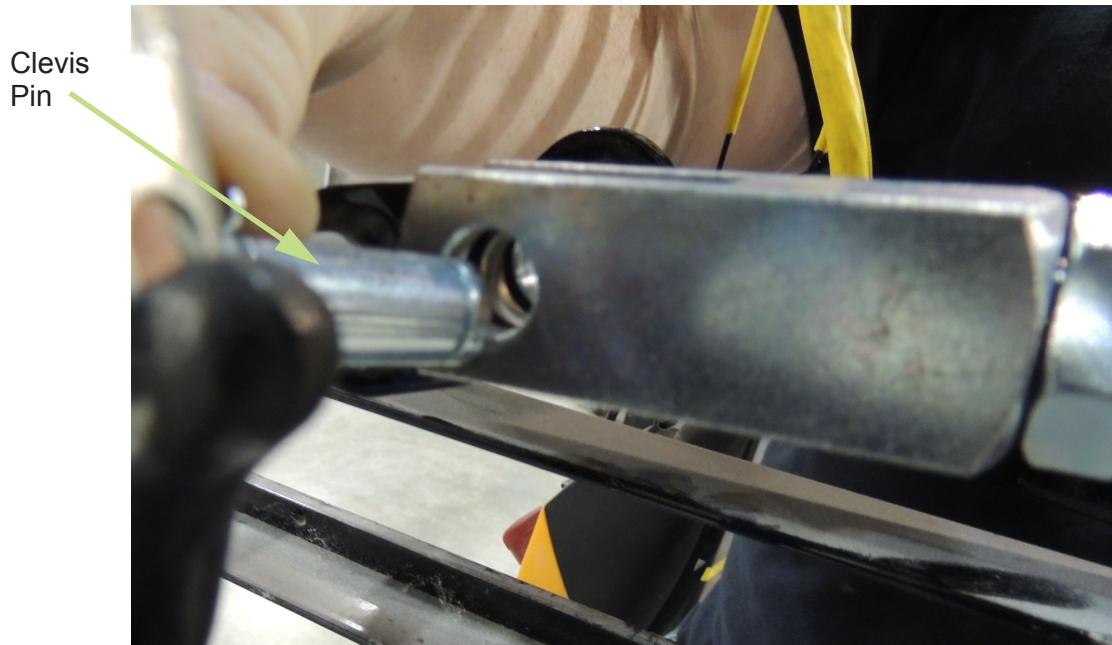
Main Cylinder - Removing Clevis Pin on Lower End
